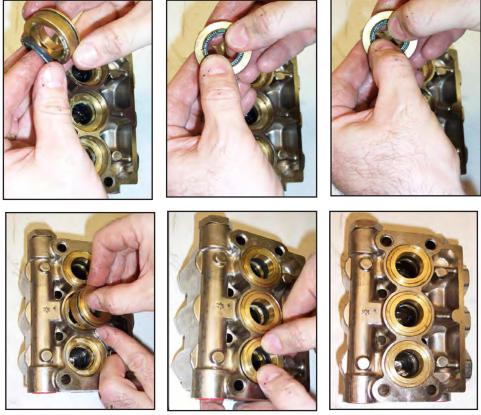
Press Low Pressure Seal Assembly into Cavity
